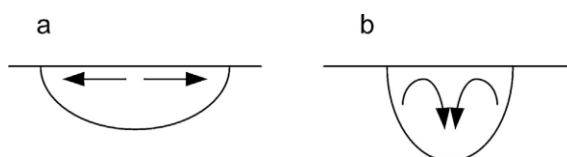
Marangoni convection in (a) Conventional TIG and (b) A-TIG welding process ^[14]
